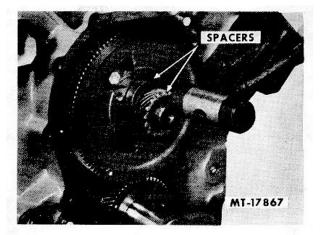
Installing Camshaft Spacers With Soft Hammer
